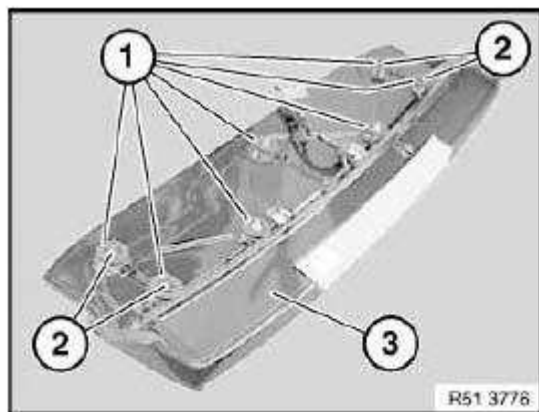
Rear Spoiler, Adjusting Screws And Washers
